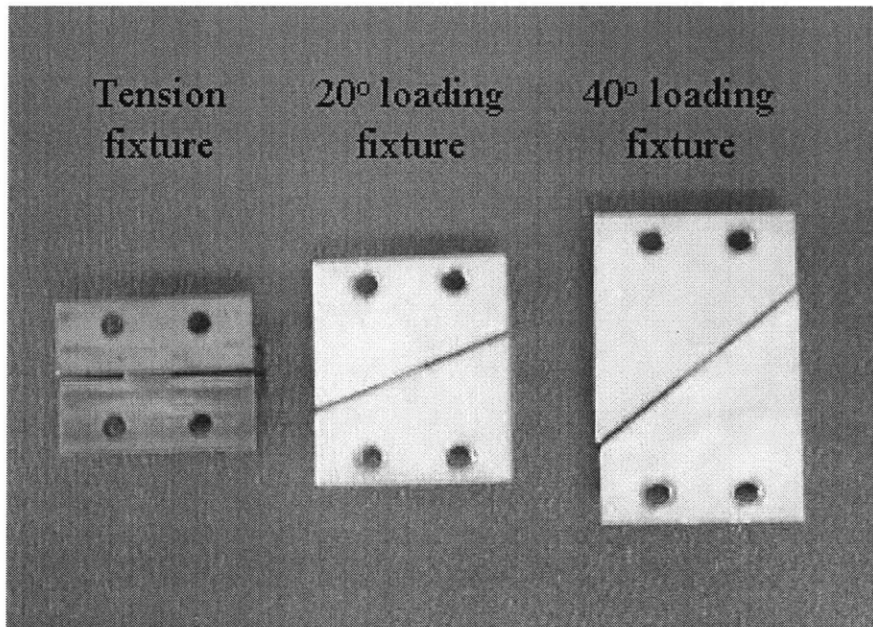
Combined-loading fixtures based on tension fixture design.
